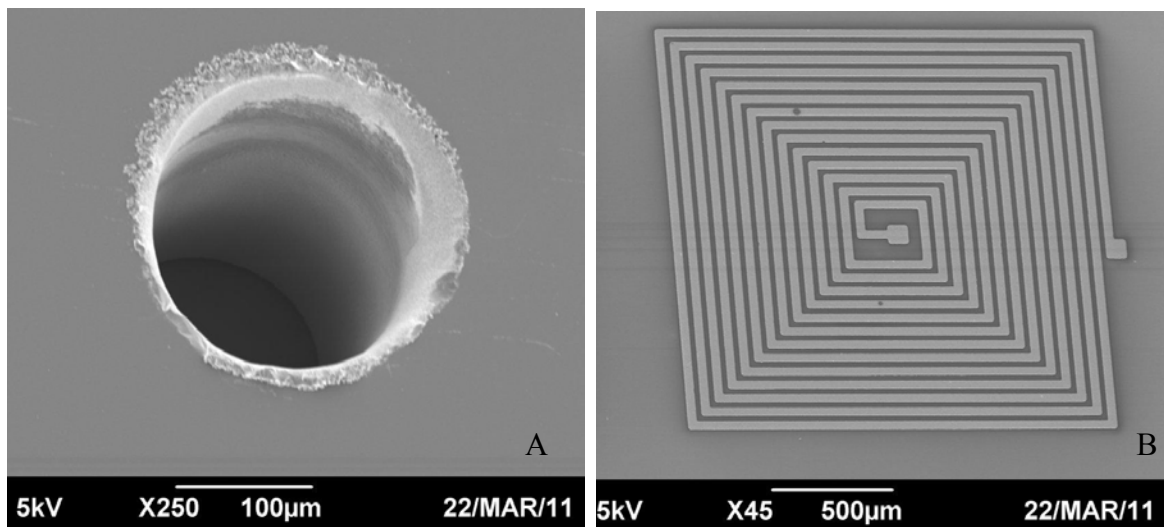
Fabrication technologies required to realize third-generation integrated wireless shear stress sensors. A) Laser drilled Pyrex through holes. B) Electroplated planar copper coils.
